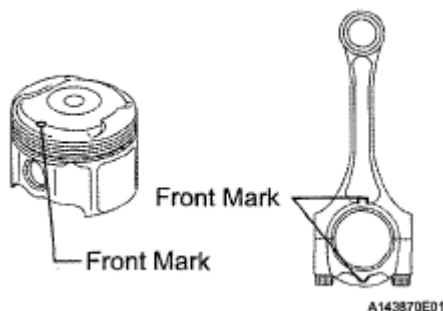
Identifying Piston Mark And Connecting Rod Mark Location
